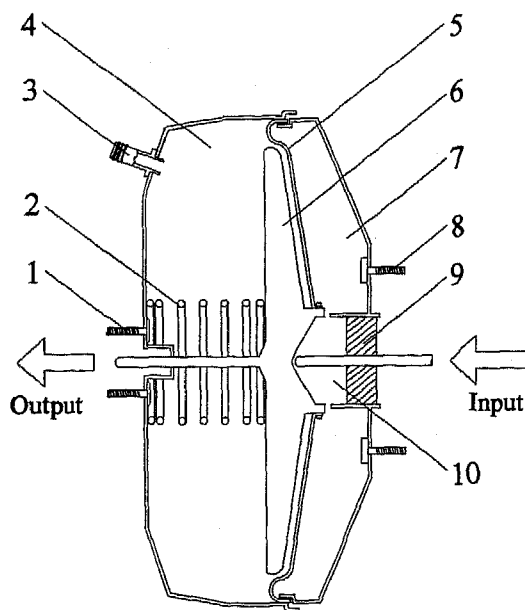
Simplified schematic of a typical vacuum power booster; 1 master cylinder mounting bolts, 2 return spring, 3 vacuum connection and check valve, 4 partial vacuum chamber, 5 diaphragm, 6 diaphragm plate, 7 rear chamber, 8 booster mounting bolts, 9 inlet air filter, 10 air control valve hardware location.
